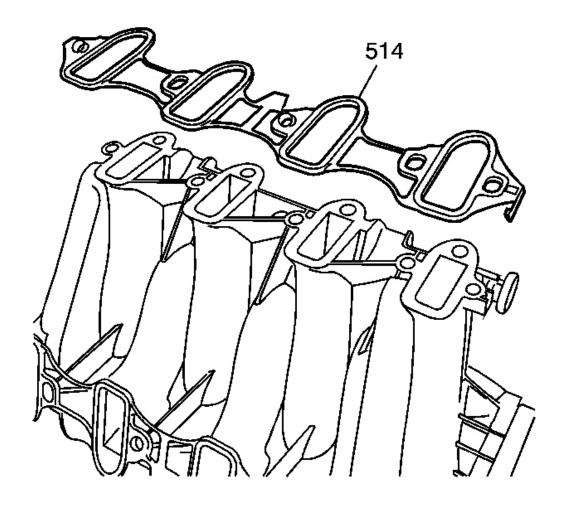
View Of Intake Manifold-To-Cylinder Head Gasket Courtesy of GENERAL MOTORS CORP.
